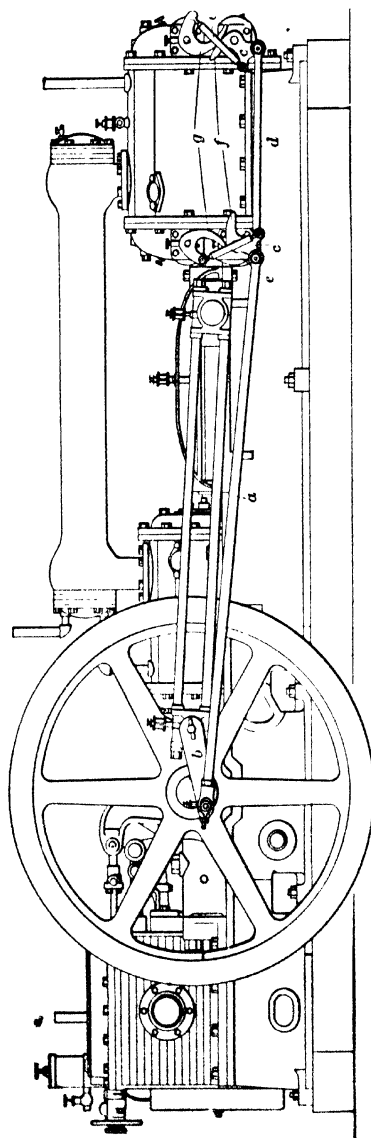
Valve Motion of Low-Pressure Air Cylinder. Norwalk Compressor.
